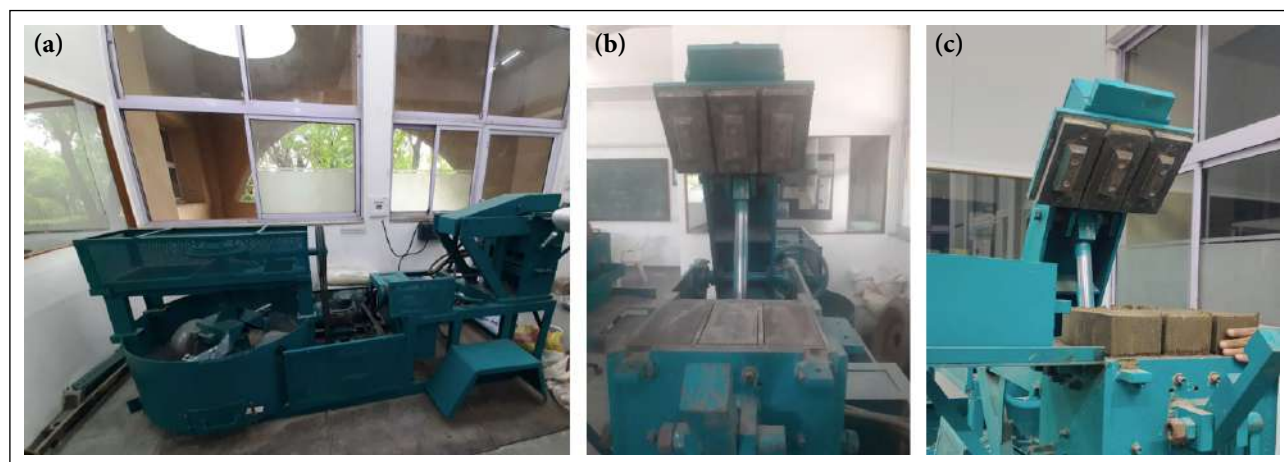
(a) Hydraulic brick-making machine. (a) Hydraulic compressor. (c) Production of brick.
